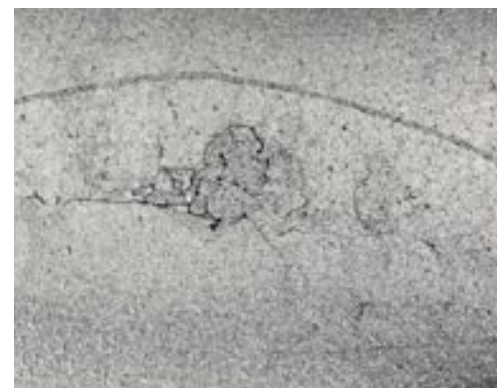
An example of a leaking casting with a cold fold defect caused by poor liquid residue removal. This defect is only visible after etching.
